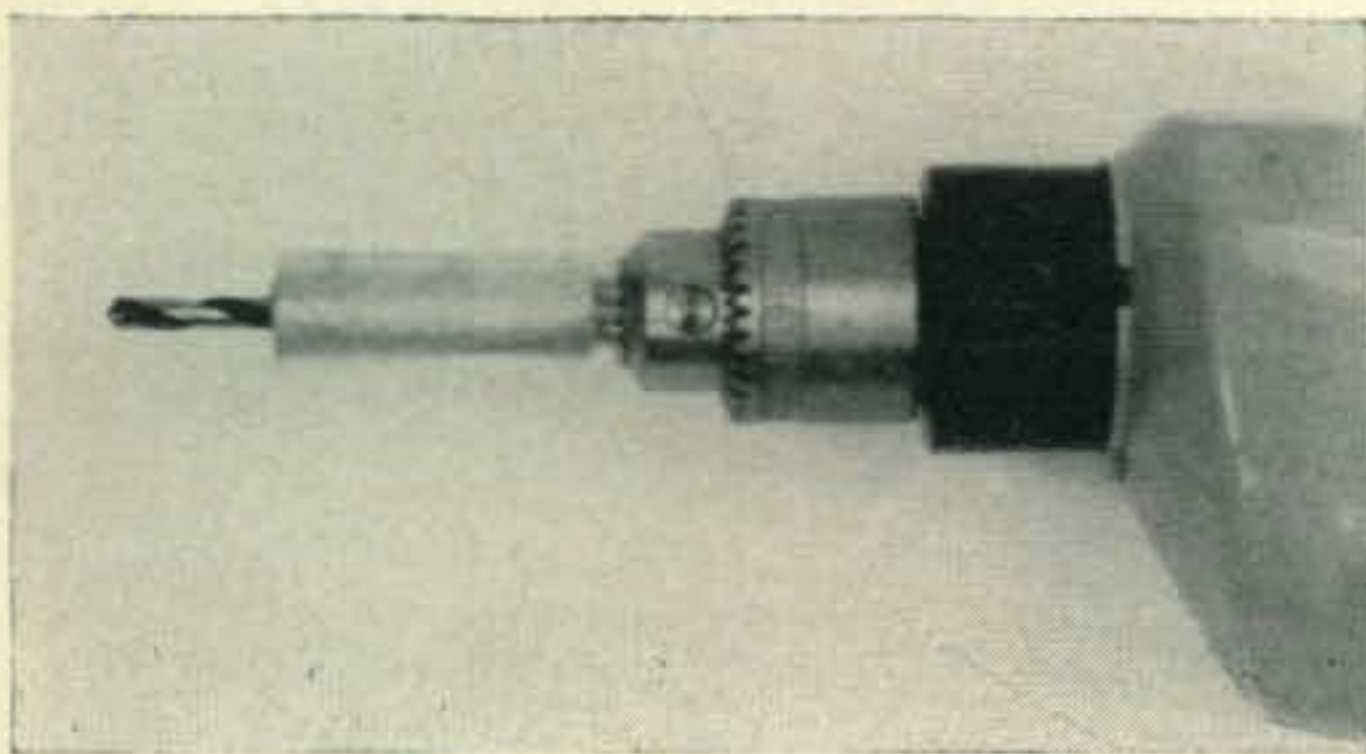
A piece of stiff plastic tubing, slipped over the twist drill, will limit the depth of the latter through the rear of the material and prevent its damaging internal components.
